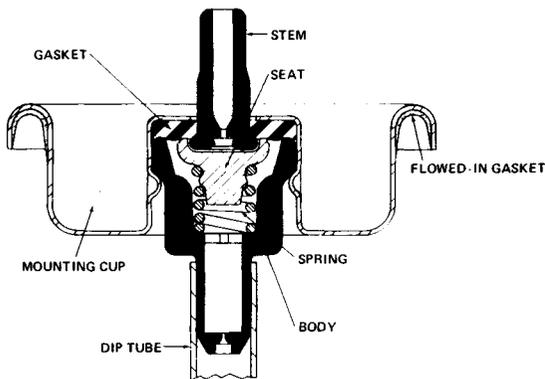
Seaquist PF-71 Toggle Valve Assembly
